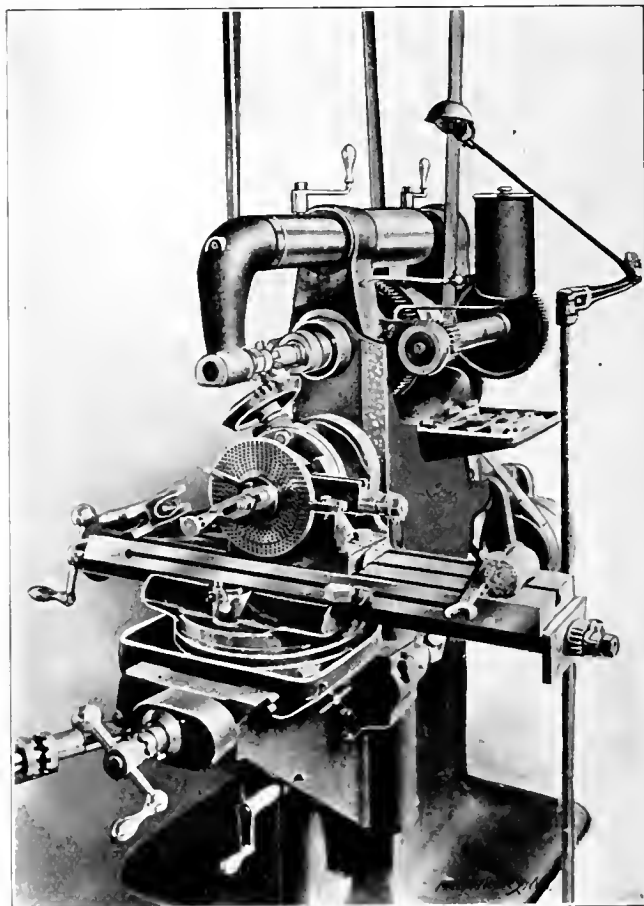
General View of Machine as Arranged for Cutting Bevel Gear.
